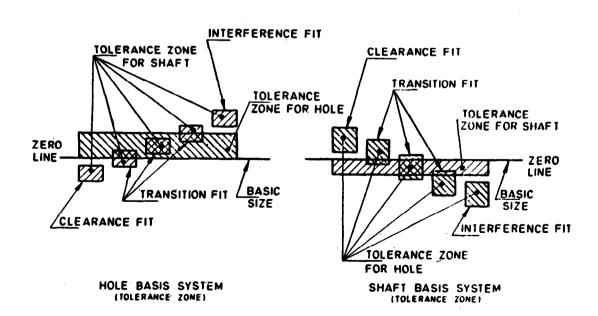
EXAMPLE ILLUSTRATING HOLE BASIS AND SHAFT BASIS SYSTEMS
